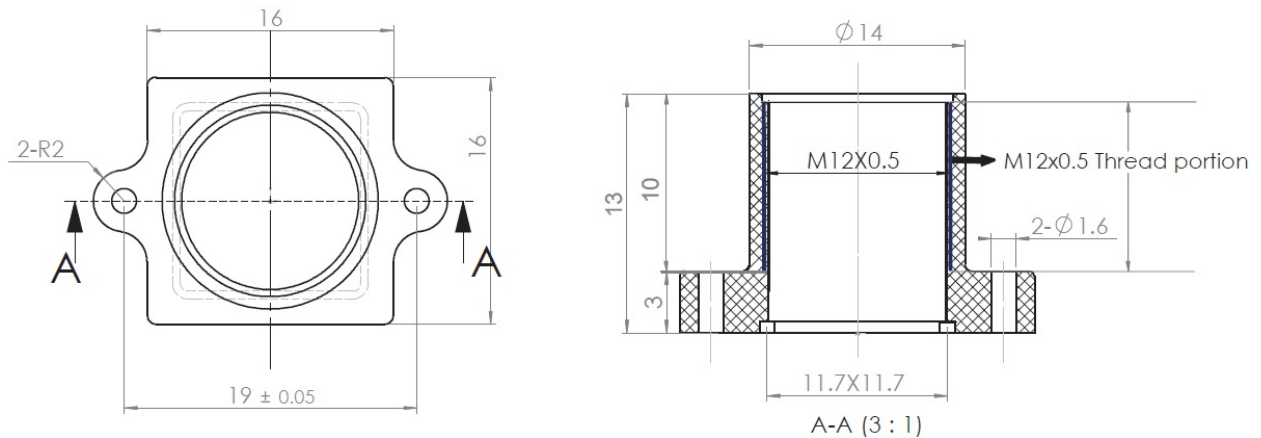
e-CAM10_CU0130_MOD camera module's S-Mount holder outline dimension drawing
